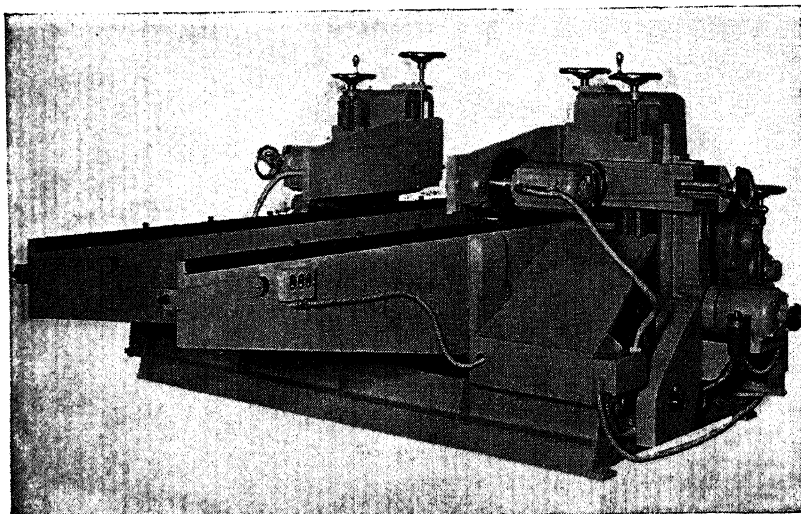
Double cut-off saw of arc welded construction. Weighs 5700 lbs. less than former construction, is stronger, costs less to build and has more pleasing appearance.
